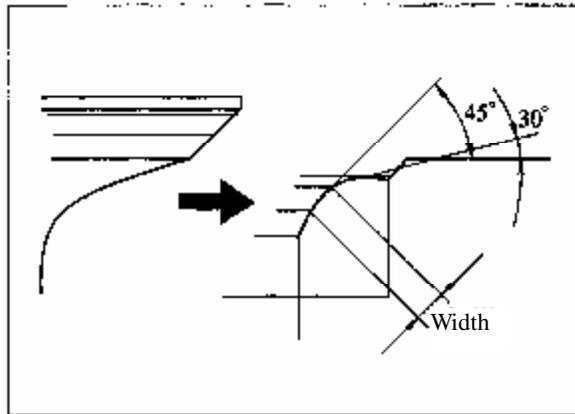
Grinding the Valve Seat with 30° and 45° mill
